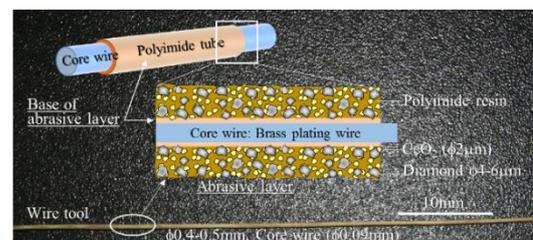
Proposed fixed abrasive wire tool (binder: polyimide resin)
